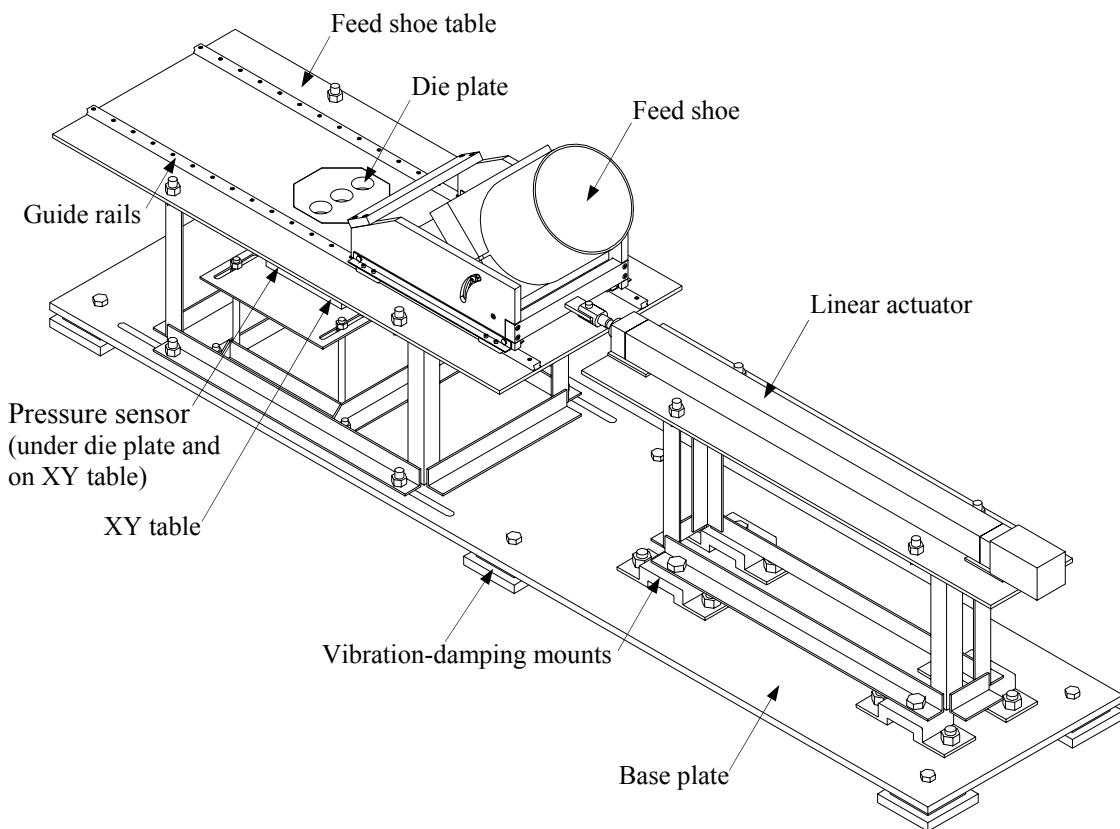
An AutoCAD drawing of the assembled PDT-II
